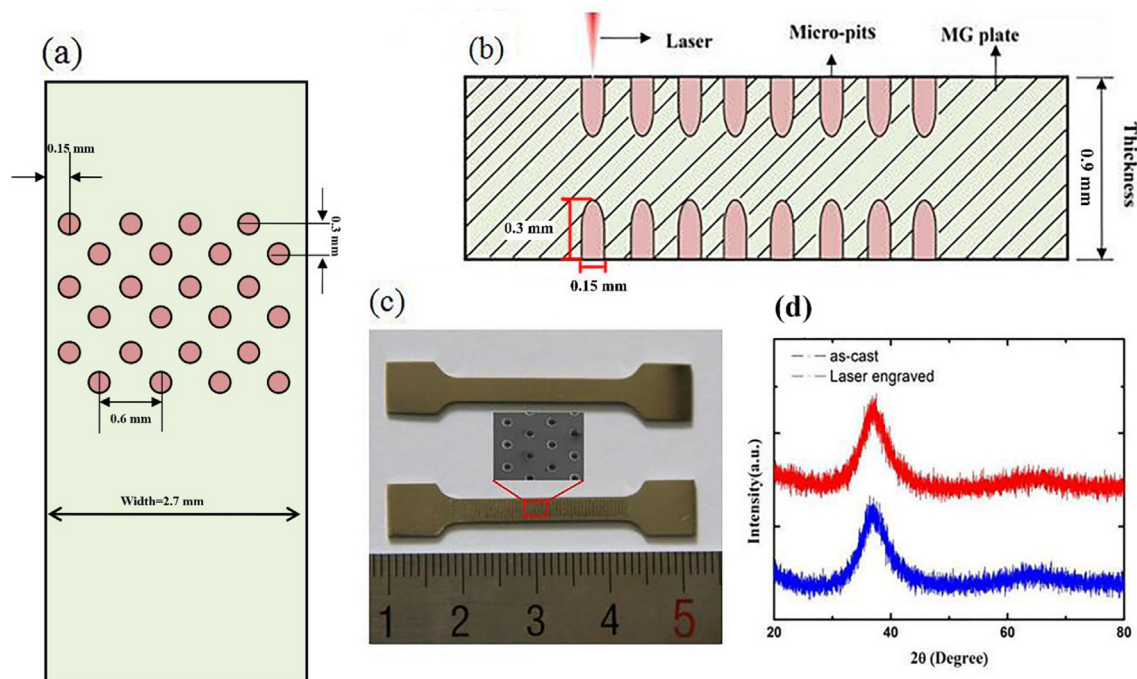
(a) and (b) The Bullet shaped micro pits worked on both surfaces of plates using a laser-engraving technology. (c) The dog bone shaped as-cast and Laser engraved (L-E) specimens. (d) XRD patterns confirming the fully amorphous structure of the as-cast and (L-E) specimens.
